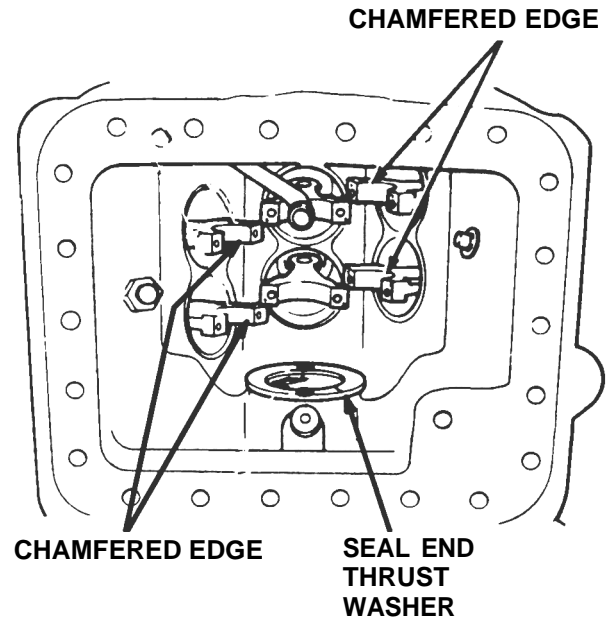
Installing Piston Rod Assemblies and Seal End Thrust Washer
